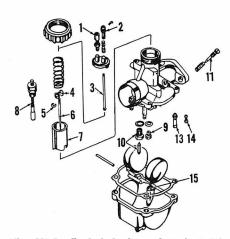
Exploded view of typical Mikuni VM carburetor.
